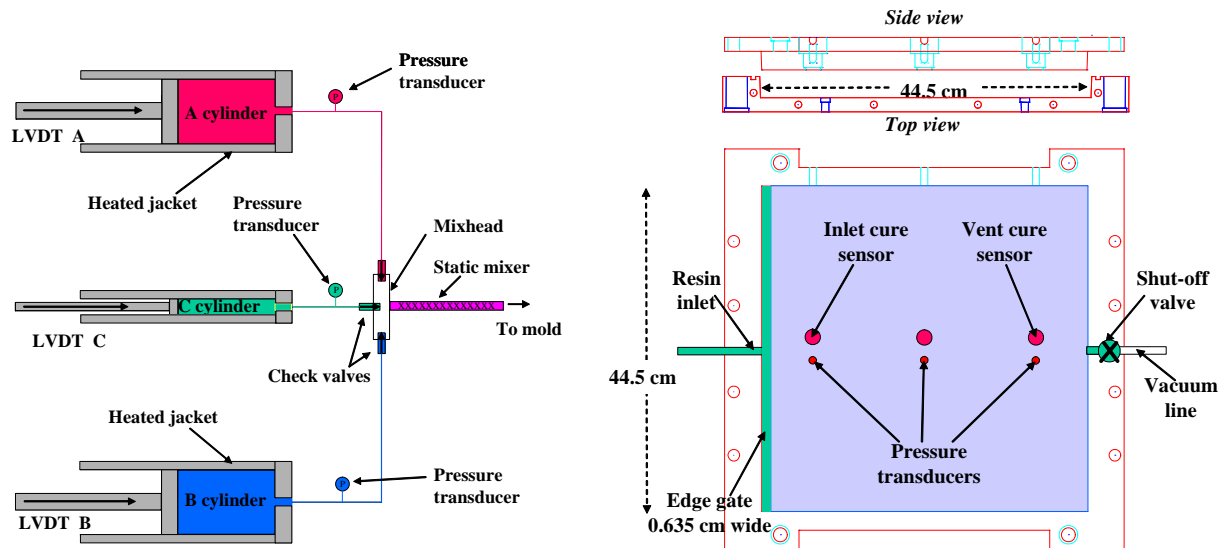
Schematic diagrams of the resin dispensing unit and of the steel mold.
